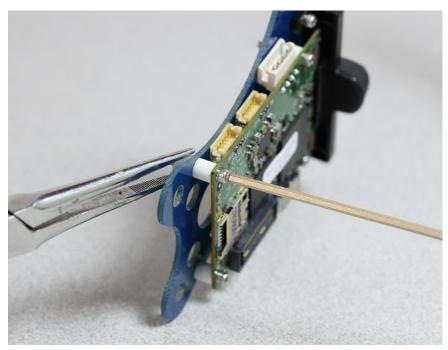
Removing the Snapdragon Flight $^{\mathsf{TM}}$ board from its mount plate
